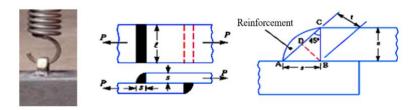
Critical welding joints on top plate hydraulic stands
